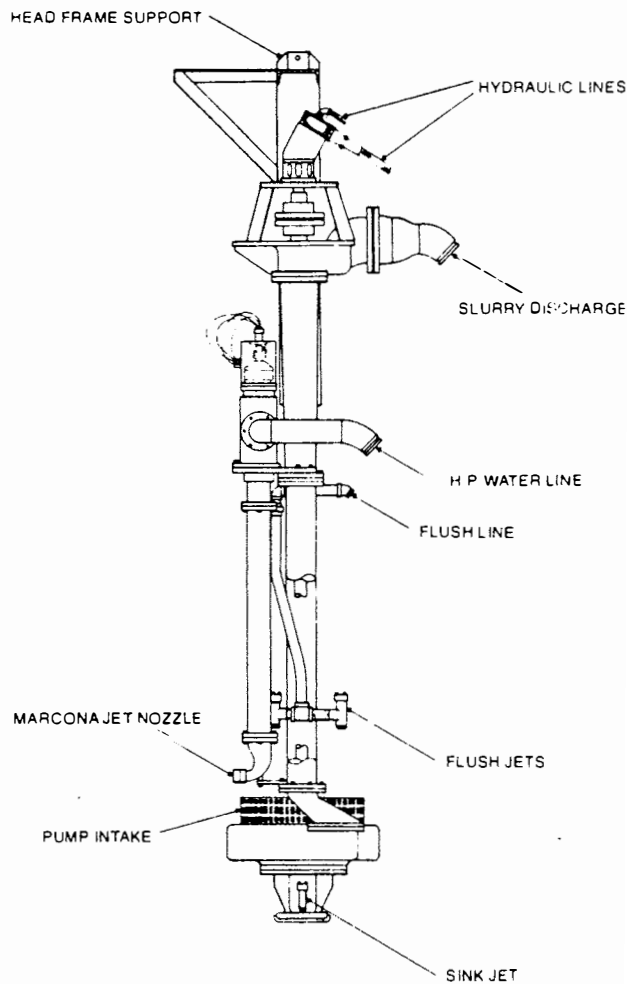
Marconaflo Caisson Type Sluicing/Slurry Pump Unit
